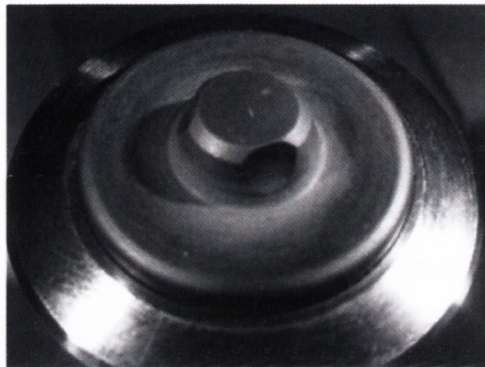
Unthreaded Tool Pin with 3 Flats [31]
